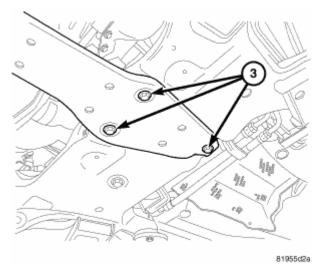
Identifying Rear Crossmember Courtesy of CHRYSLER LLC
